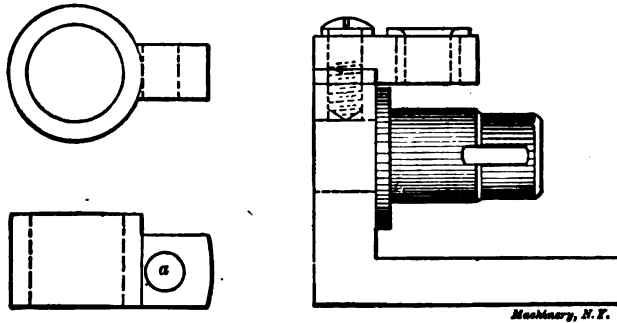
Piece to be Drilled, and Jig Used for this Work.
